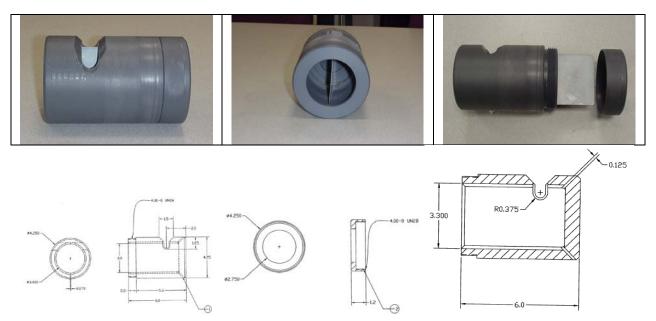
Fixture for "Throwing Power" and Alloy Composition Test
